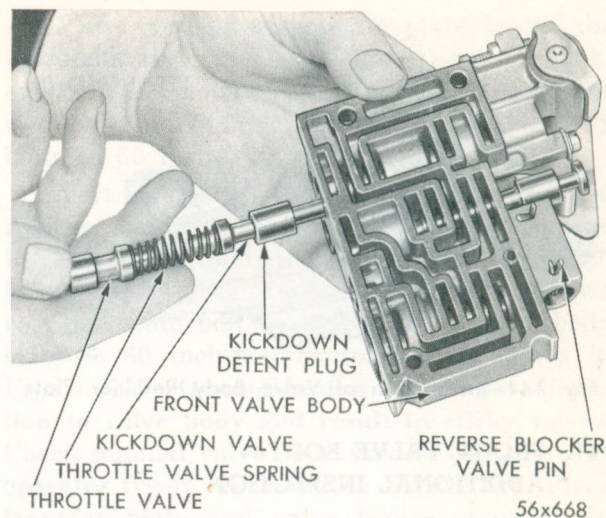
Removal and Installation of Throttle Valve, Spring, Kickdown Valve and Detent Plug
